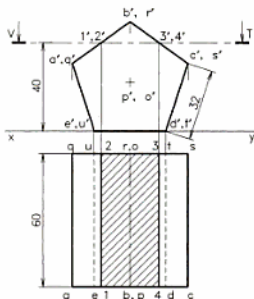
Sectional top view of a prism (section plane parallel to HP).
